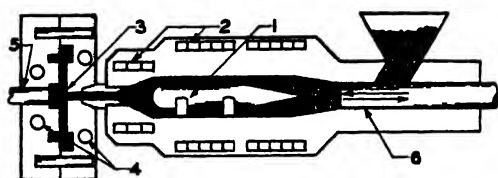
Sketch illustrating the principle of the injection molding press: (1) spreader, (2) heaters, (3) mold, (4) cooling channels, (5) discharge pin, and (6) plunger.
